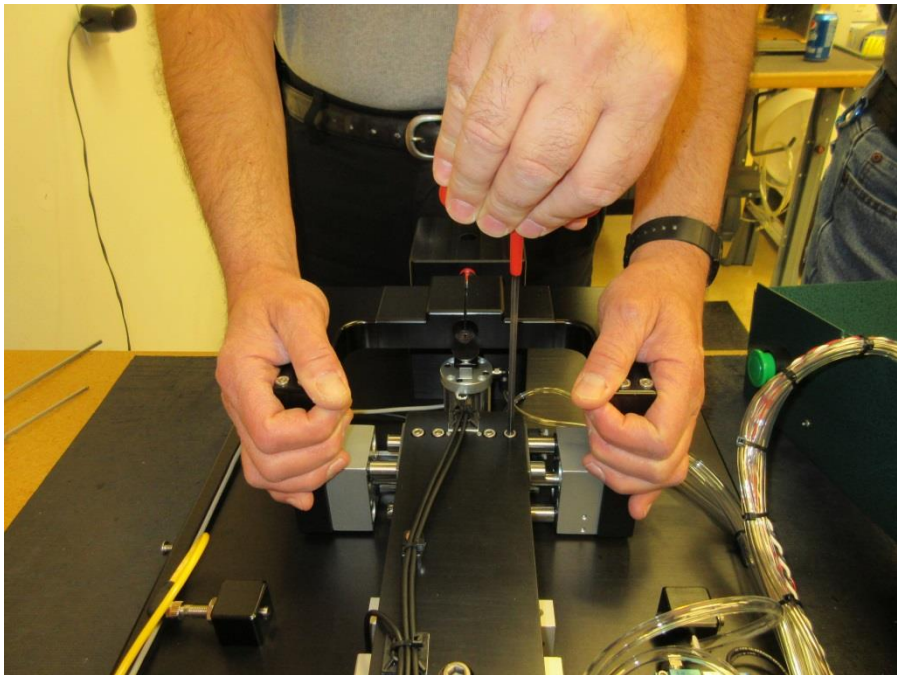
Holding the gripper in place and tightening the mounting bolts
